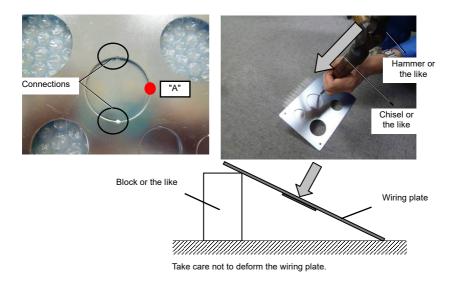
Punching Out Semi-perforated Sections in the Wiring Plate and Setting Cable Glands or Conduits
